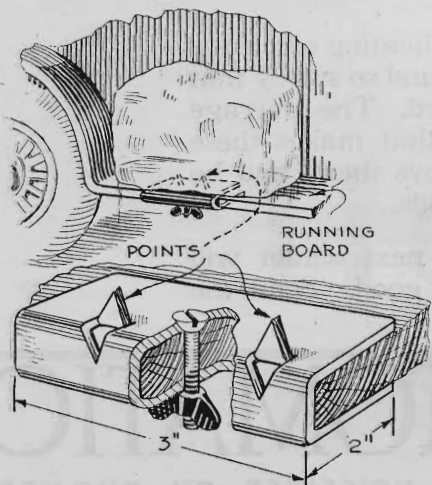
Sheet iron, bent over running board and bolted down, makes a good ice carrier.
